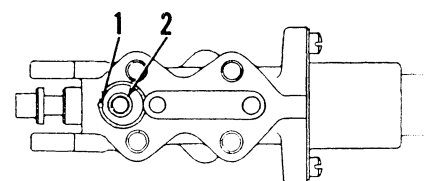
Top view of Massey-Harris Pony control valve with hydraulic lines pad removed.
